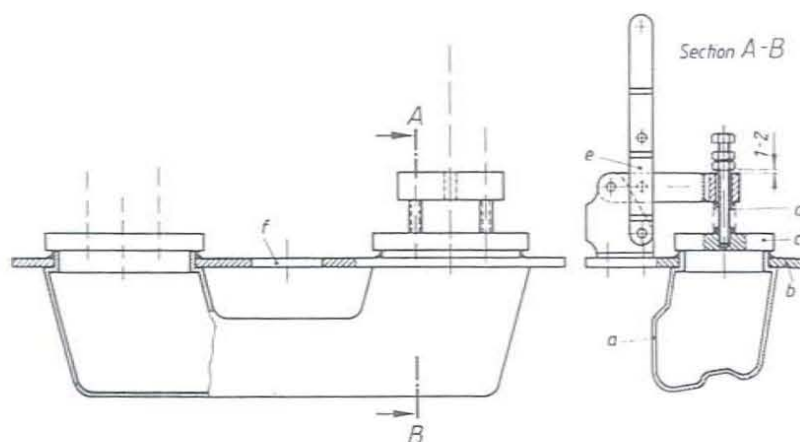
Electroforming with clamping device for the rotational molding of car armrests. (a) Electroform, (b) soldered-on retaining flange, (c) aluminum lid, (d) heat-resistant dished springs, (e) quick clamps (toggle levers) available in the trade, (f) channels for improved heat conduction.
